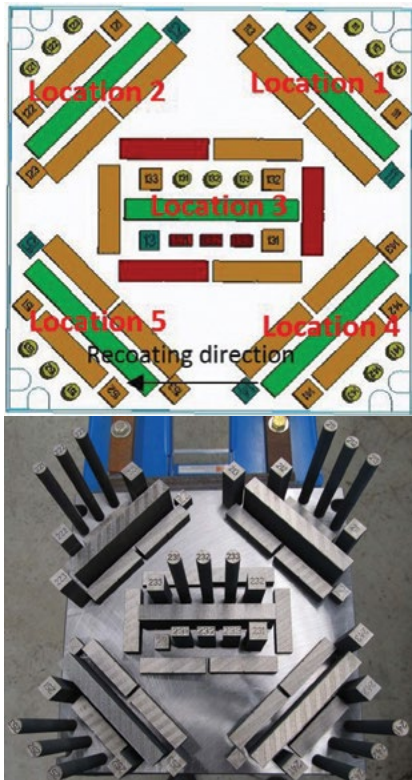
Benchmark Steel 3d Printing Test showing Locations of Parts of the Base Plate
